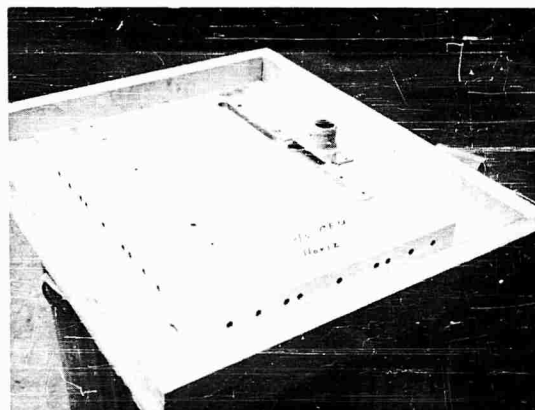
Dyna-Soar coupler electronics unit horizontal fixture
